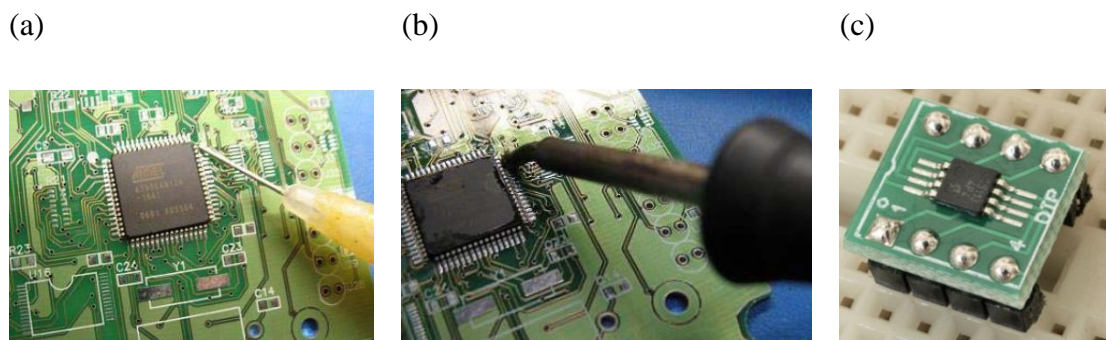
13 (a) Applying flux around the pins of ICs, (b) using soldering gun with right amount of solder iron to solder the pins of ICs, (c) complete In-Amp with 8-lead DIP configuration.
